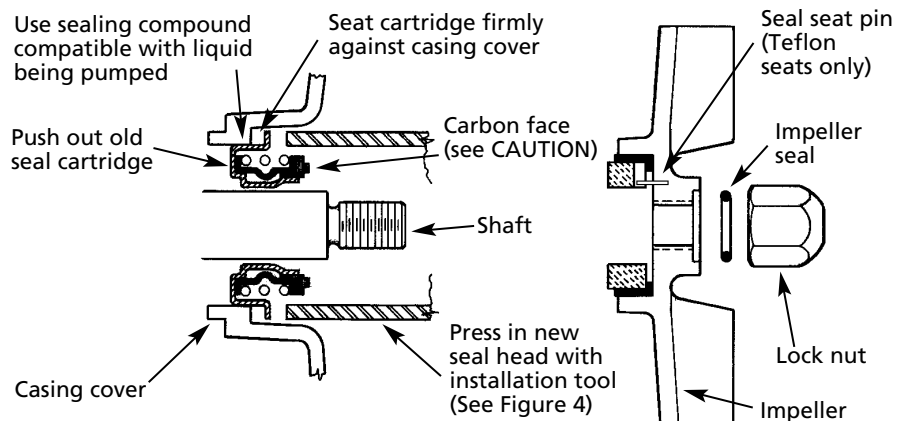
Mechanical Seal Replacement (Teflon seal shown)
